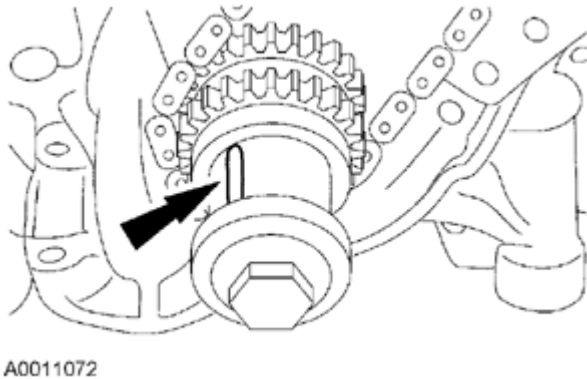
Locating Crankcase Keyway In 11 O'Clock Position
